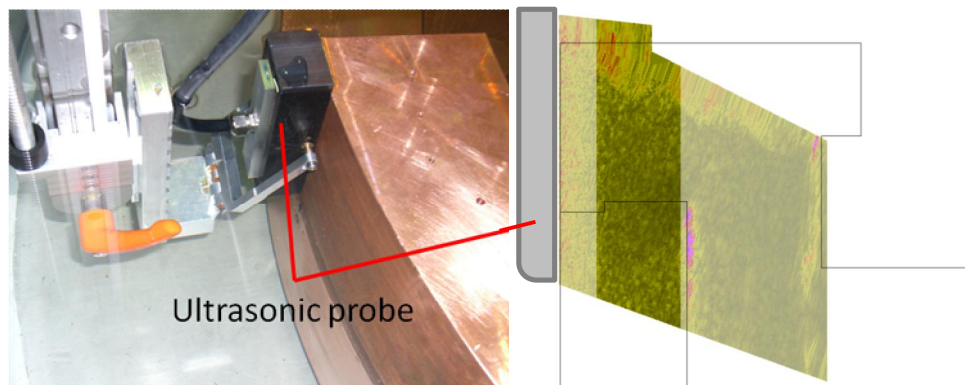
Linear phased array ultrasonic testing of FSW weld.
